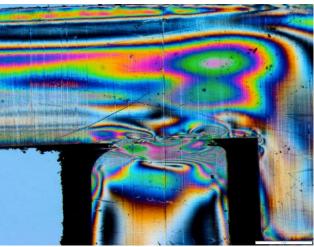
Melt Zone Image for Sample Welded with Weld Velocity 1.0 mm/sec photographed in polarized light.
